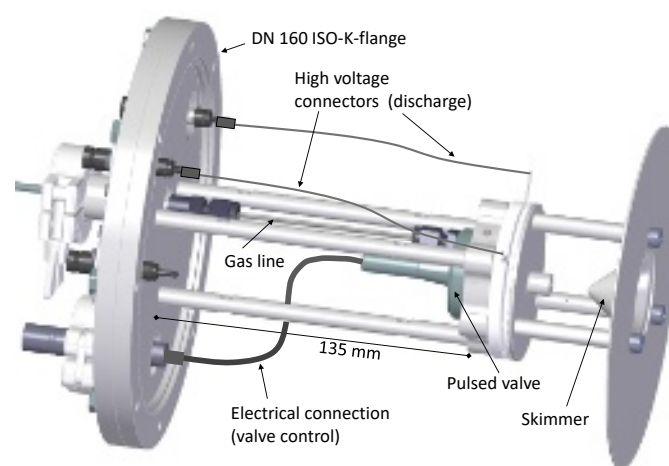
Isometric view of the supersonic expansion ion source mounted on a standard ISO-K 160 flange. All connections are supplied through feed-throughs in the mounting flange. A skimmer with a surrounding disc fitting the inner tube diameter of the vacuum chamber is mounted downstream of the nozzle, in order to allow for efficient differential pumping if experimentally required.
